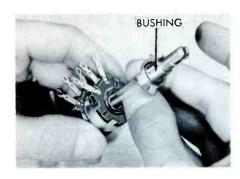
G. The Bushing Is Slipped Into Place Over the Outer Shaft.
